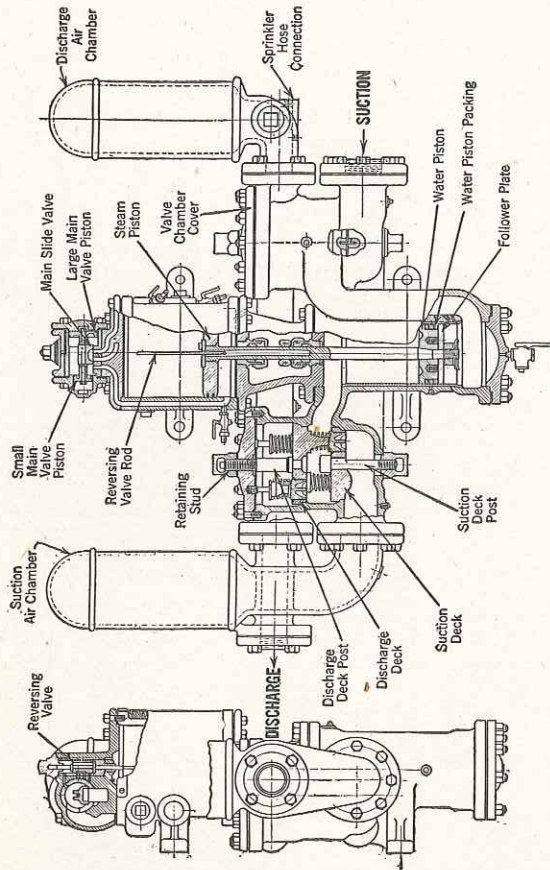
W-6-1/2 Type Boiler Feed Pump
